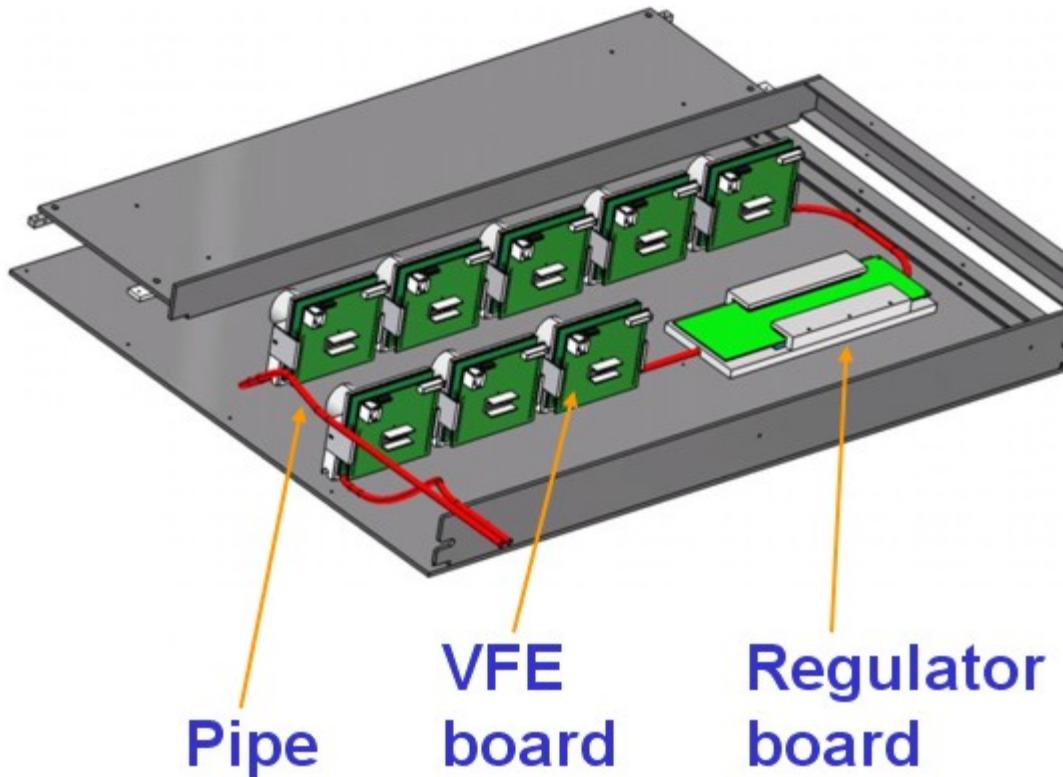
Mechanical view of a box with one regulators board and 8 VFE
